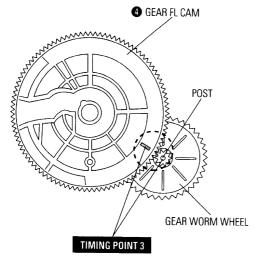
Assembly of Gear FL Cam, Gear Joint 1, 2
